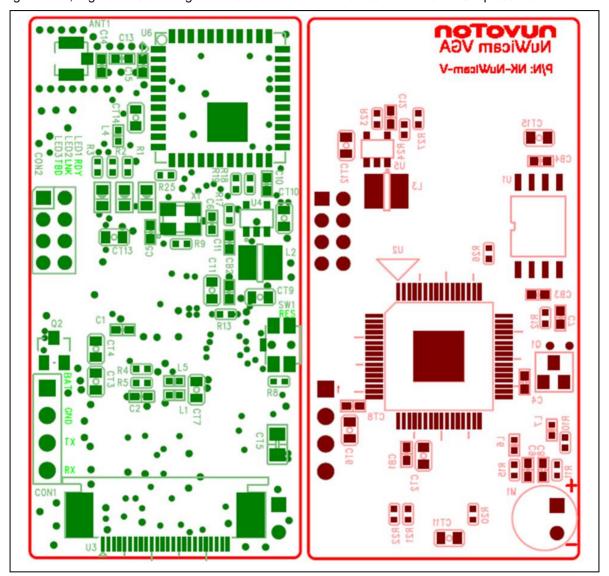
Front and Back NuWicam-VGA PCB Placement
